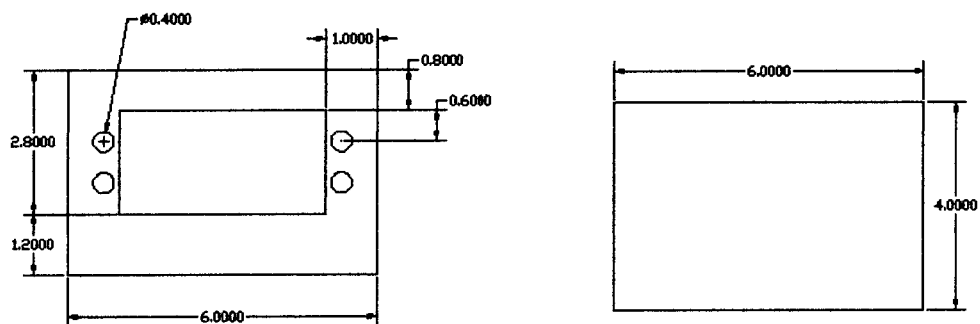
Dimension of mouter for servo of robot's shoulder
